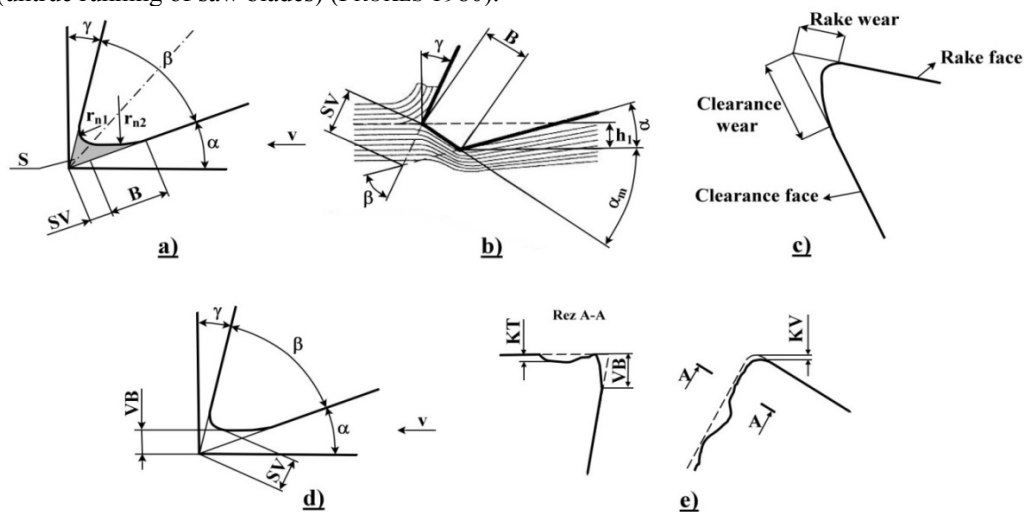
Methods of measurement of the cutting wedge tool-wear.
